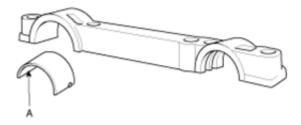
Identifying Exhaust Camshaft Upper Bearing Courtesy of KIA MOTORS AMERICA, INC.
